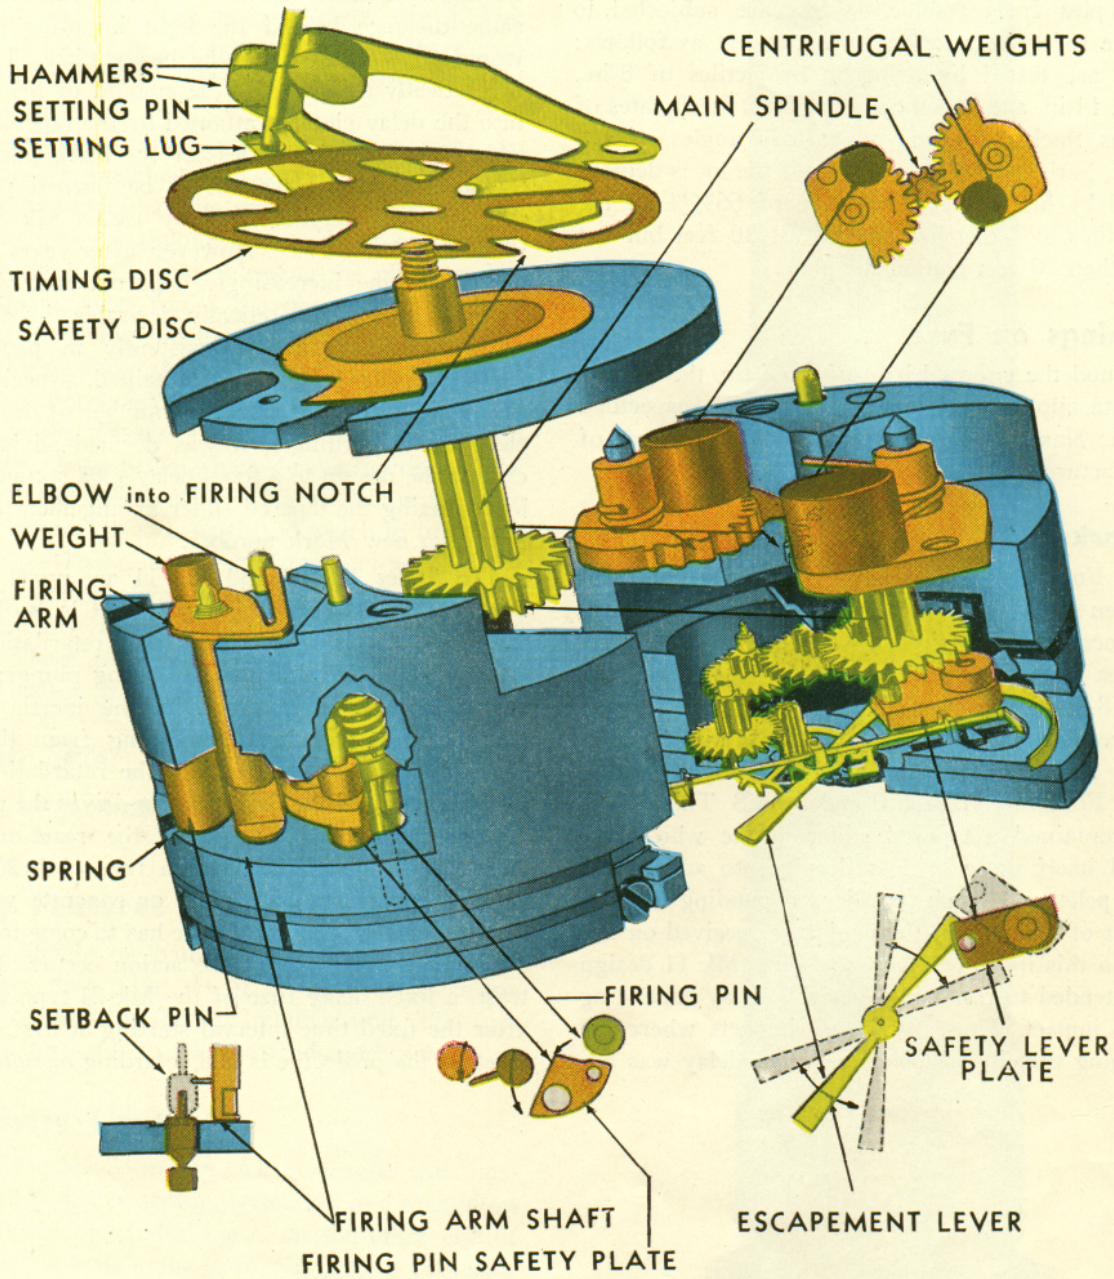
Mechanical Time Fuze Mk 25—Exploded View
